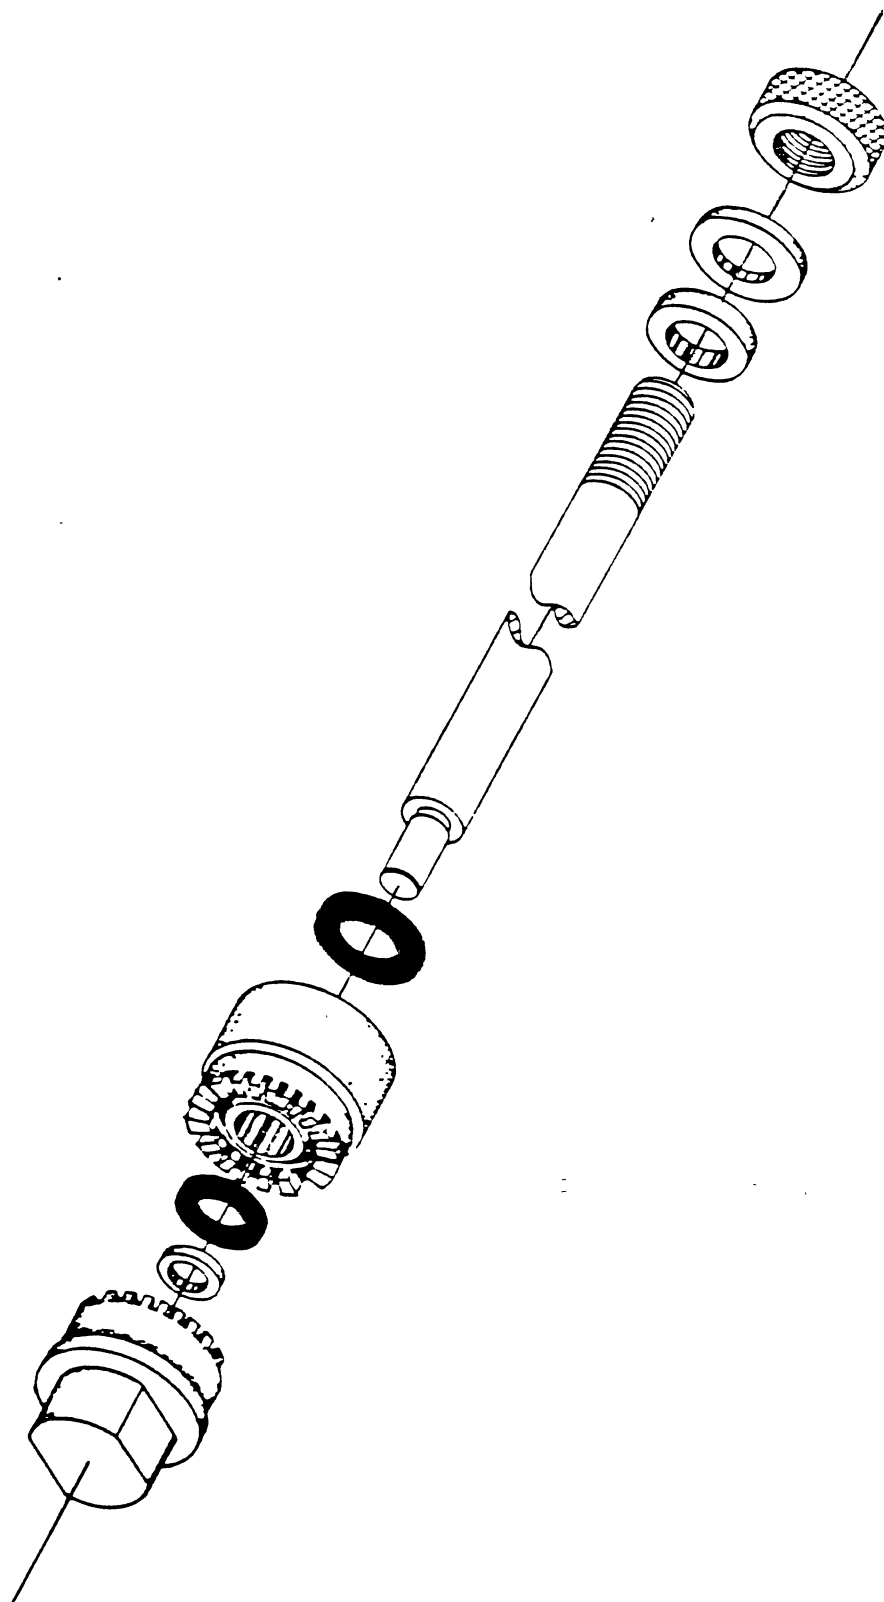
Multiple Crevice Assembly Working Electrode Holder.
